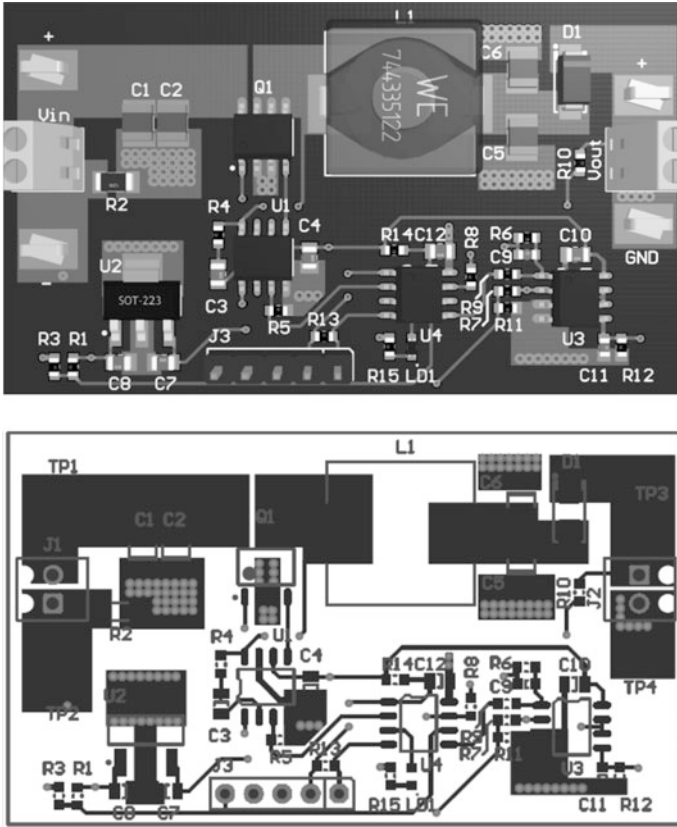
The 3D representation of BCU board and top layer of PCB
